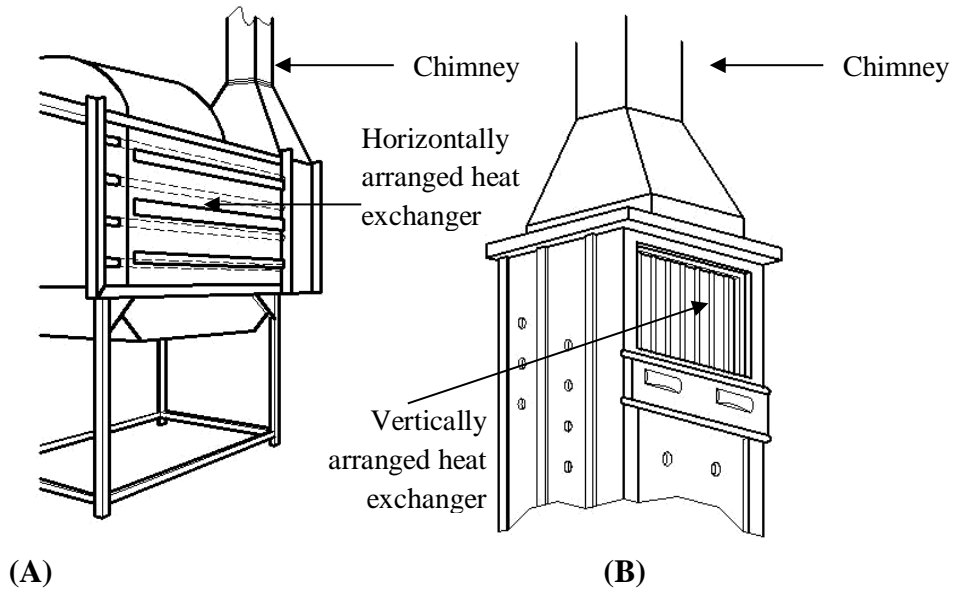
Dry type furnace using (A) horizontal and (B) vertical heat exchanger
